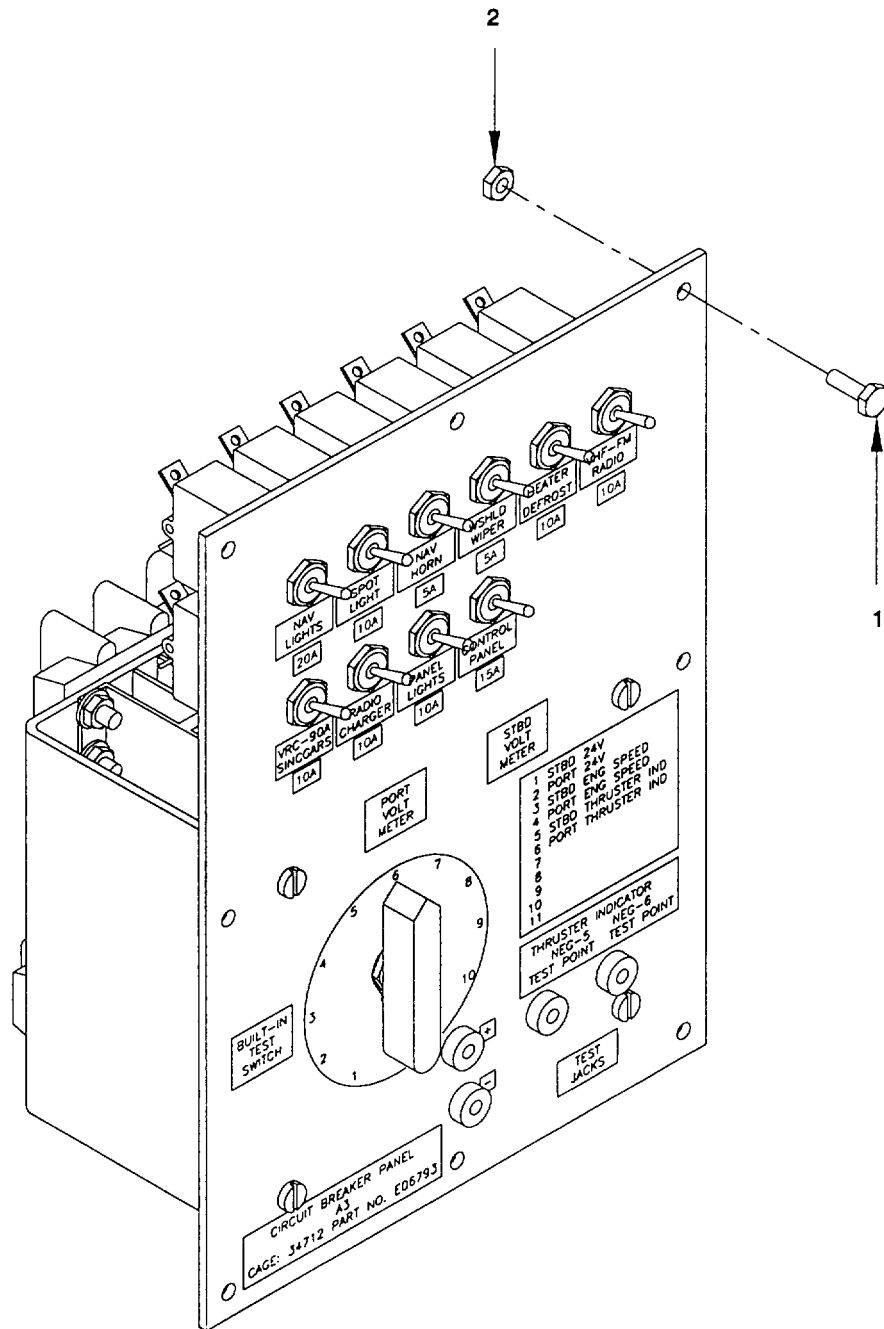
Operator Cab Circuit Breaker Panel "A3", Remove/Install.
